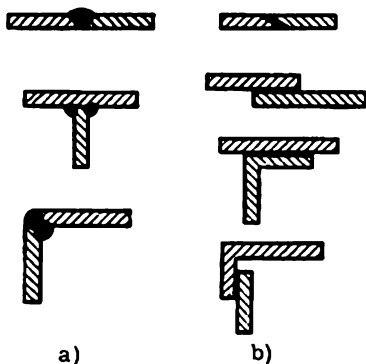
Design features of some types of (a) soldered and (b) welded joints
